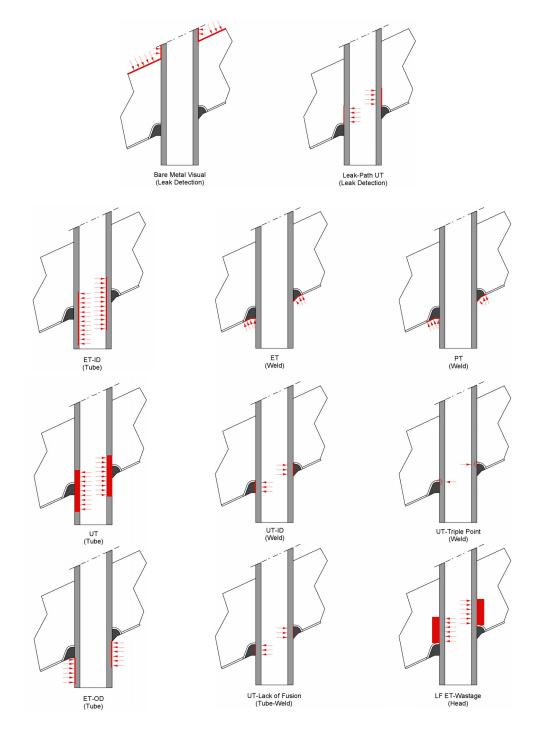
Summary of RPV Head Nozzle Inspection Techniques
